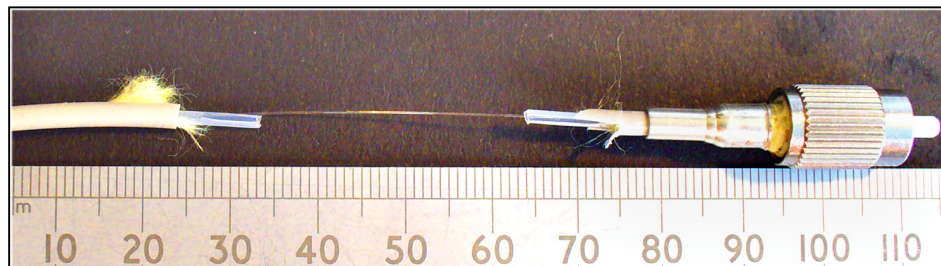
Inner tube cut through in sample shown in Figure 7.9.
